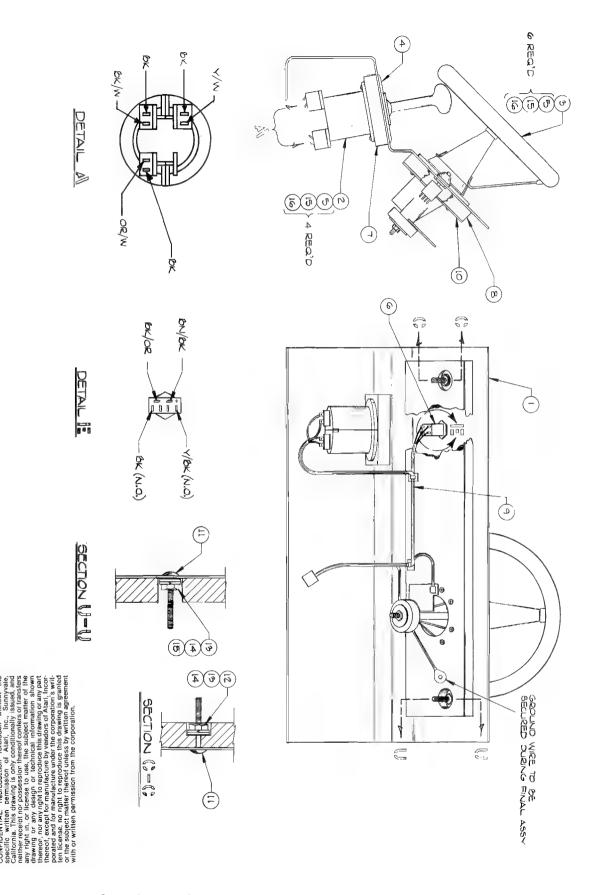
Control Panel Assembly (Graphics) A032834-01 D
